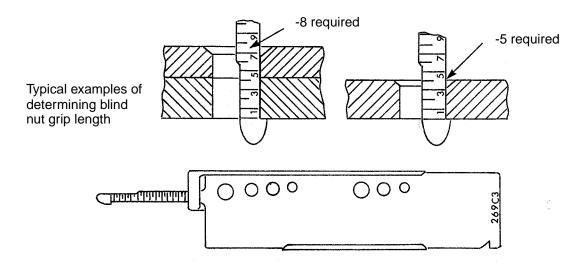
Use of a Cherrymax Rivet Grip Gauge
